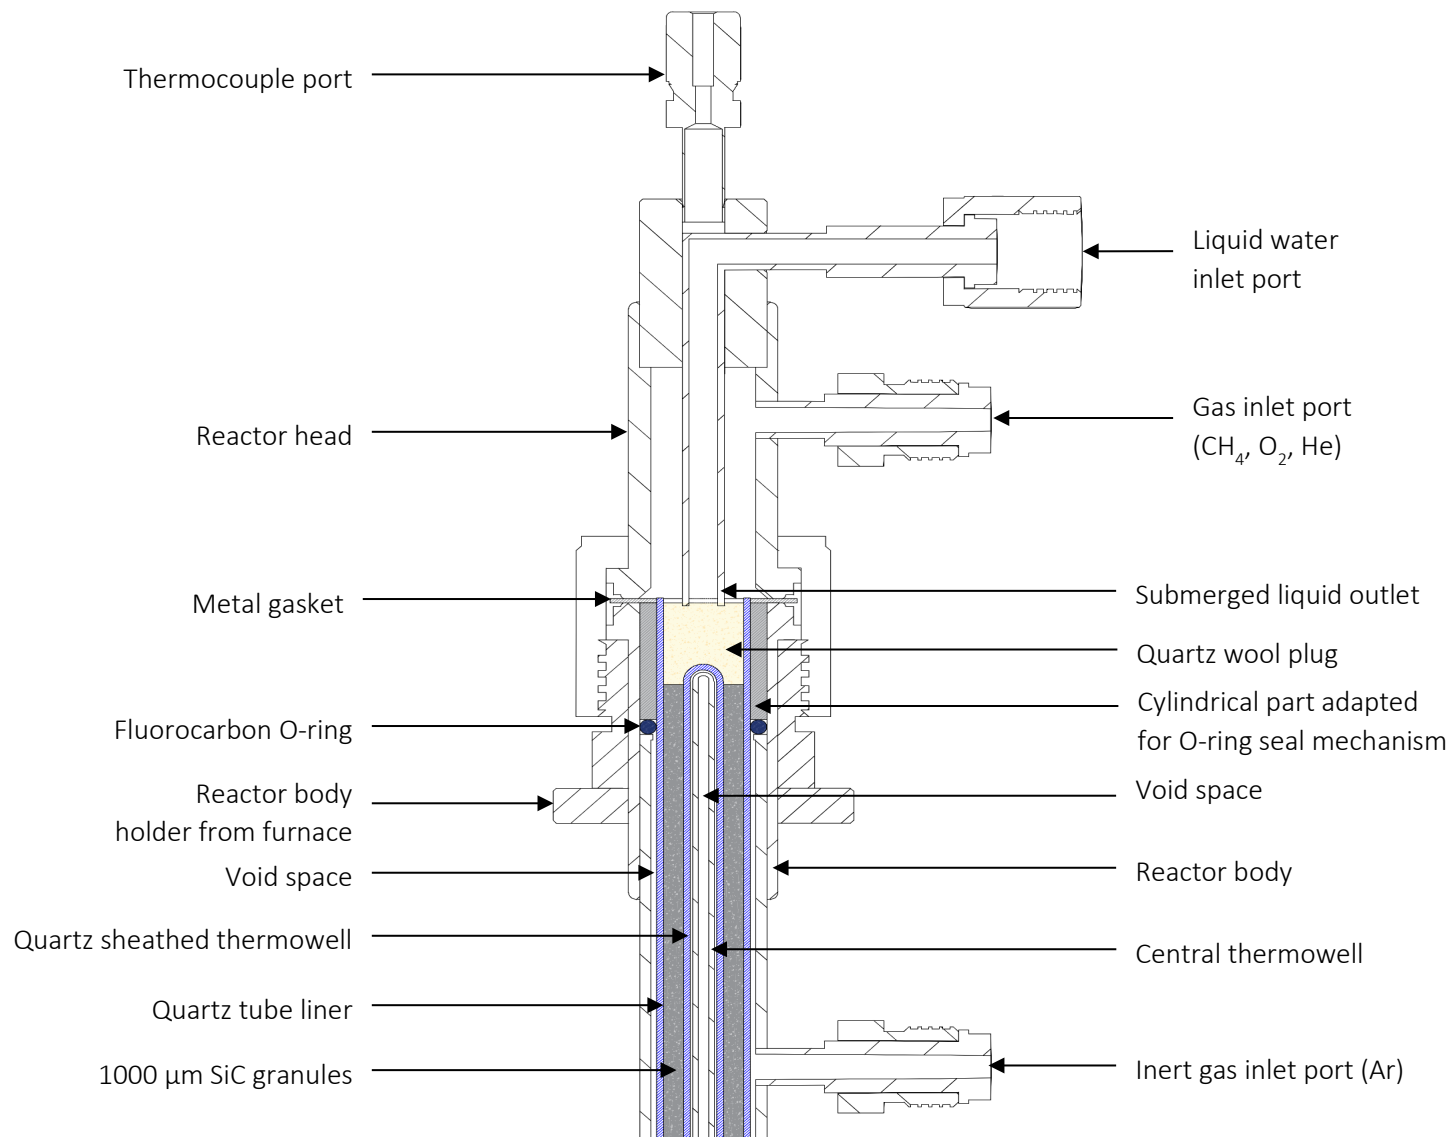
Section view of reactor top section showing reactor head, gas and liquid inlet ports and O-ring seal mechanism
